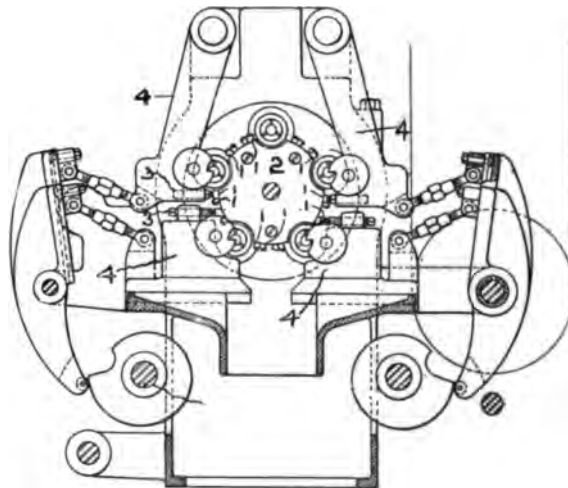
MEANS FOR RECTIFYING THE INDEXING OF MULTIPLE SPINDLE MACHINE. DAVENPORT MACHINE CO.
